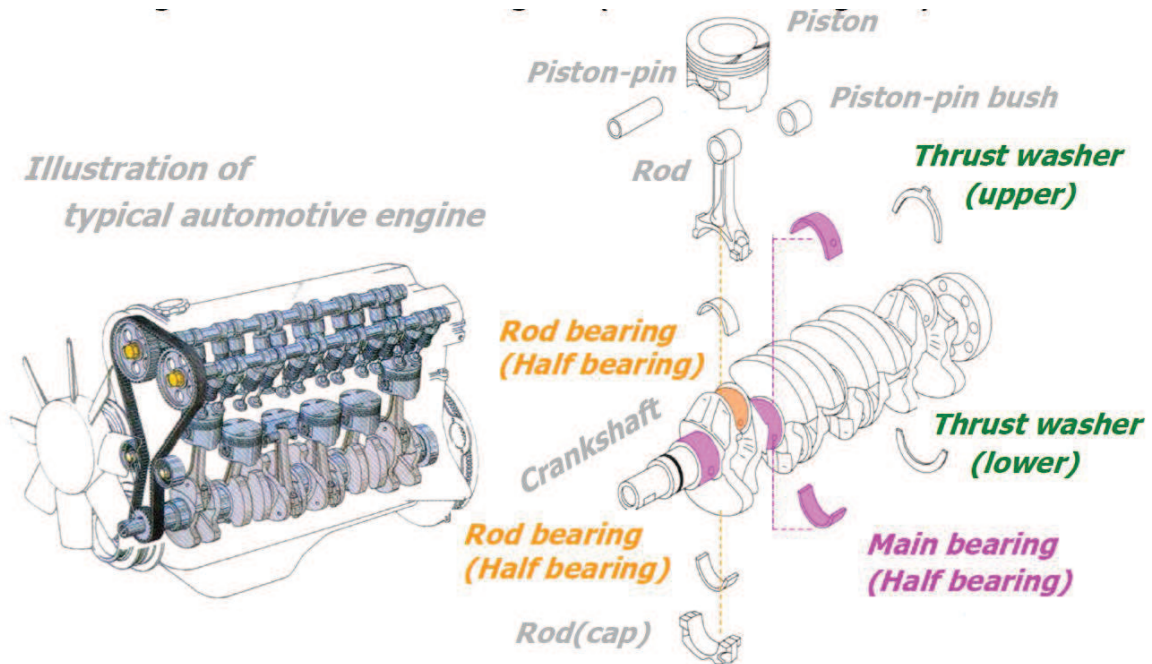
Illustration of typical engine bearings in automotive combustion engine part [24]
